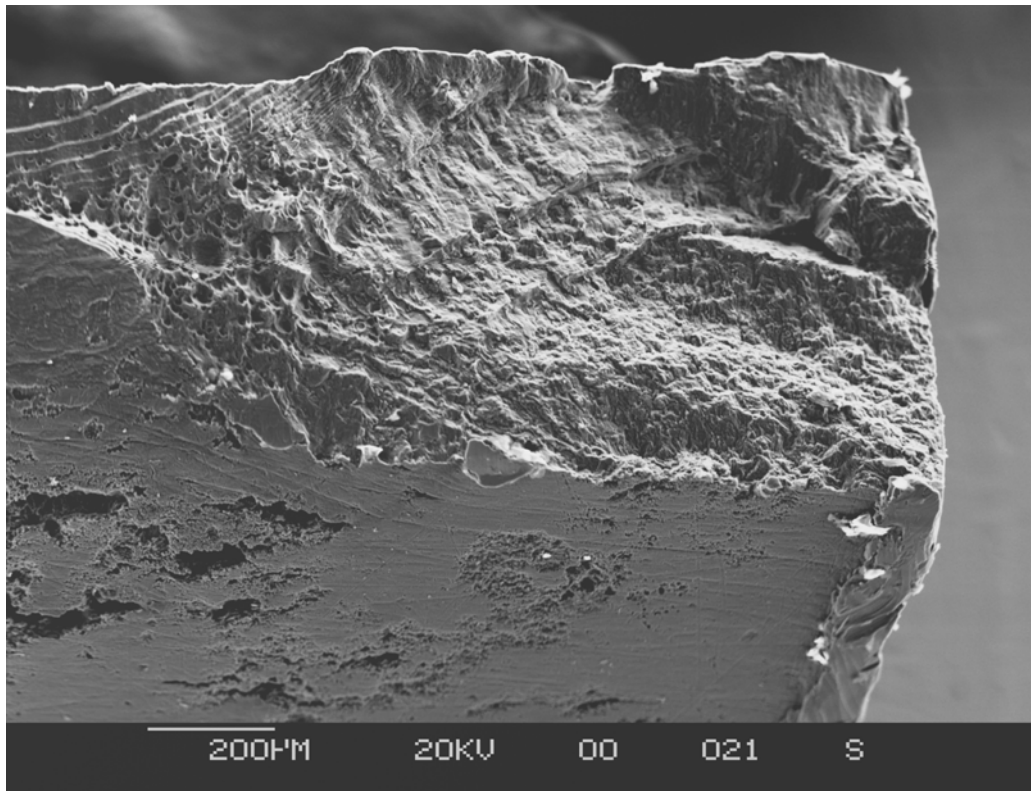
Fatigue Crack on Fracture Surface of Specimen 5616.
